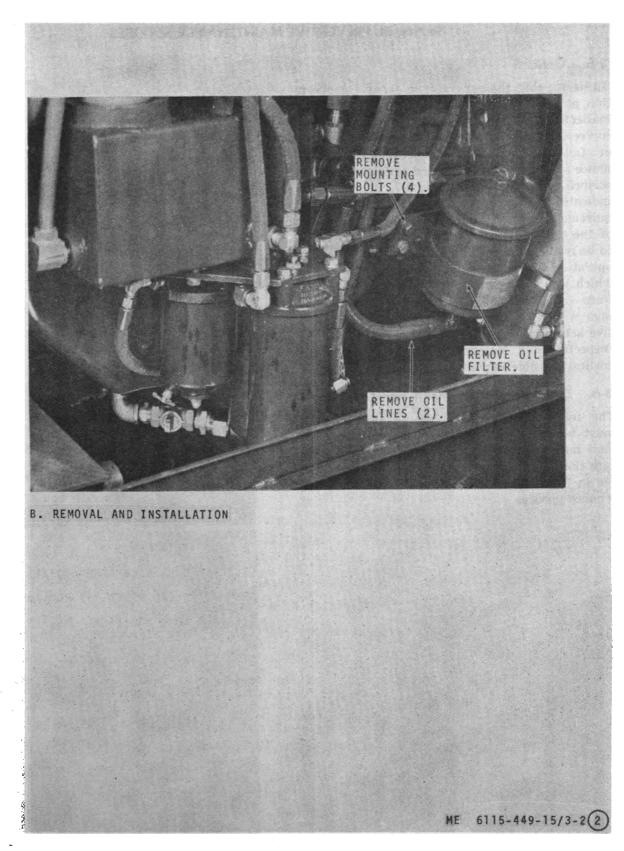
Oil filter assembly (Sheet 2 of 2).
